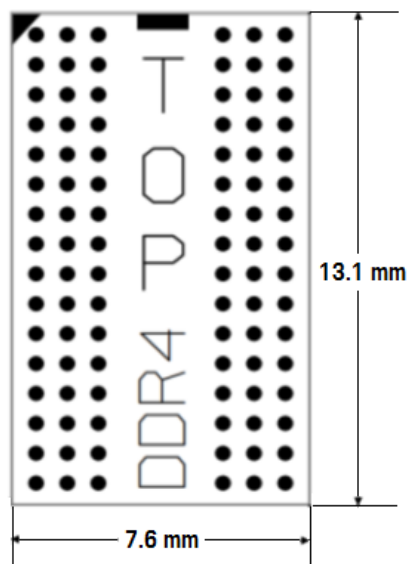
Dimensions of a W4641A interposer (TOP VIEW)
